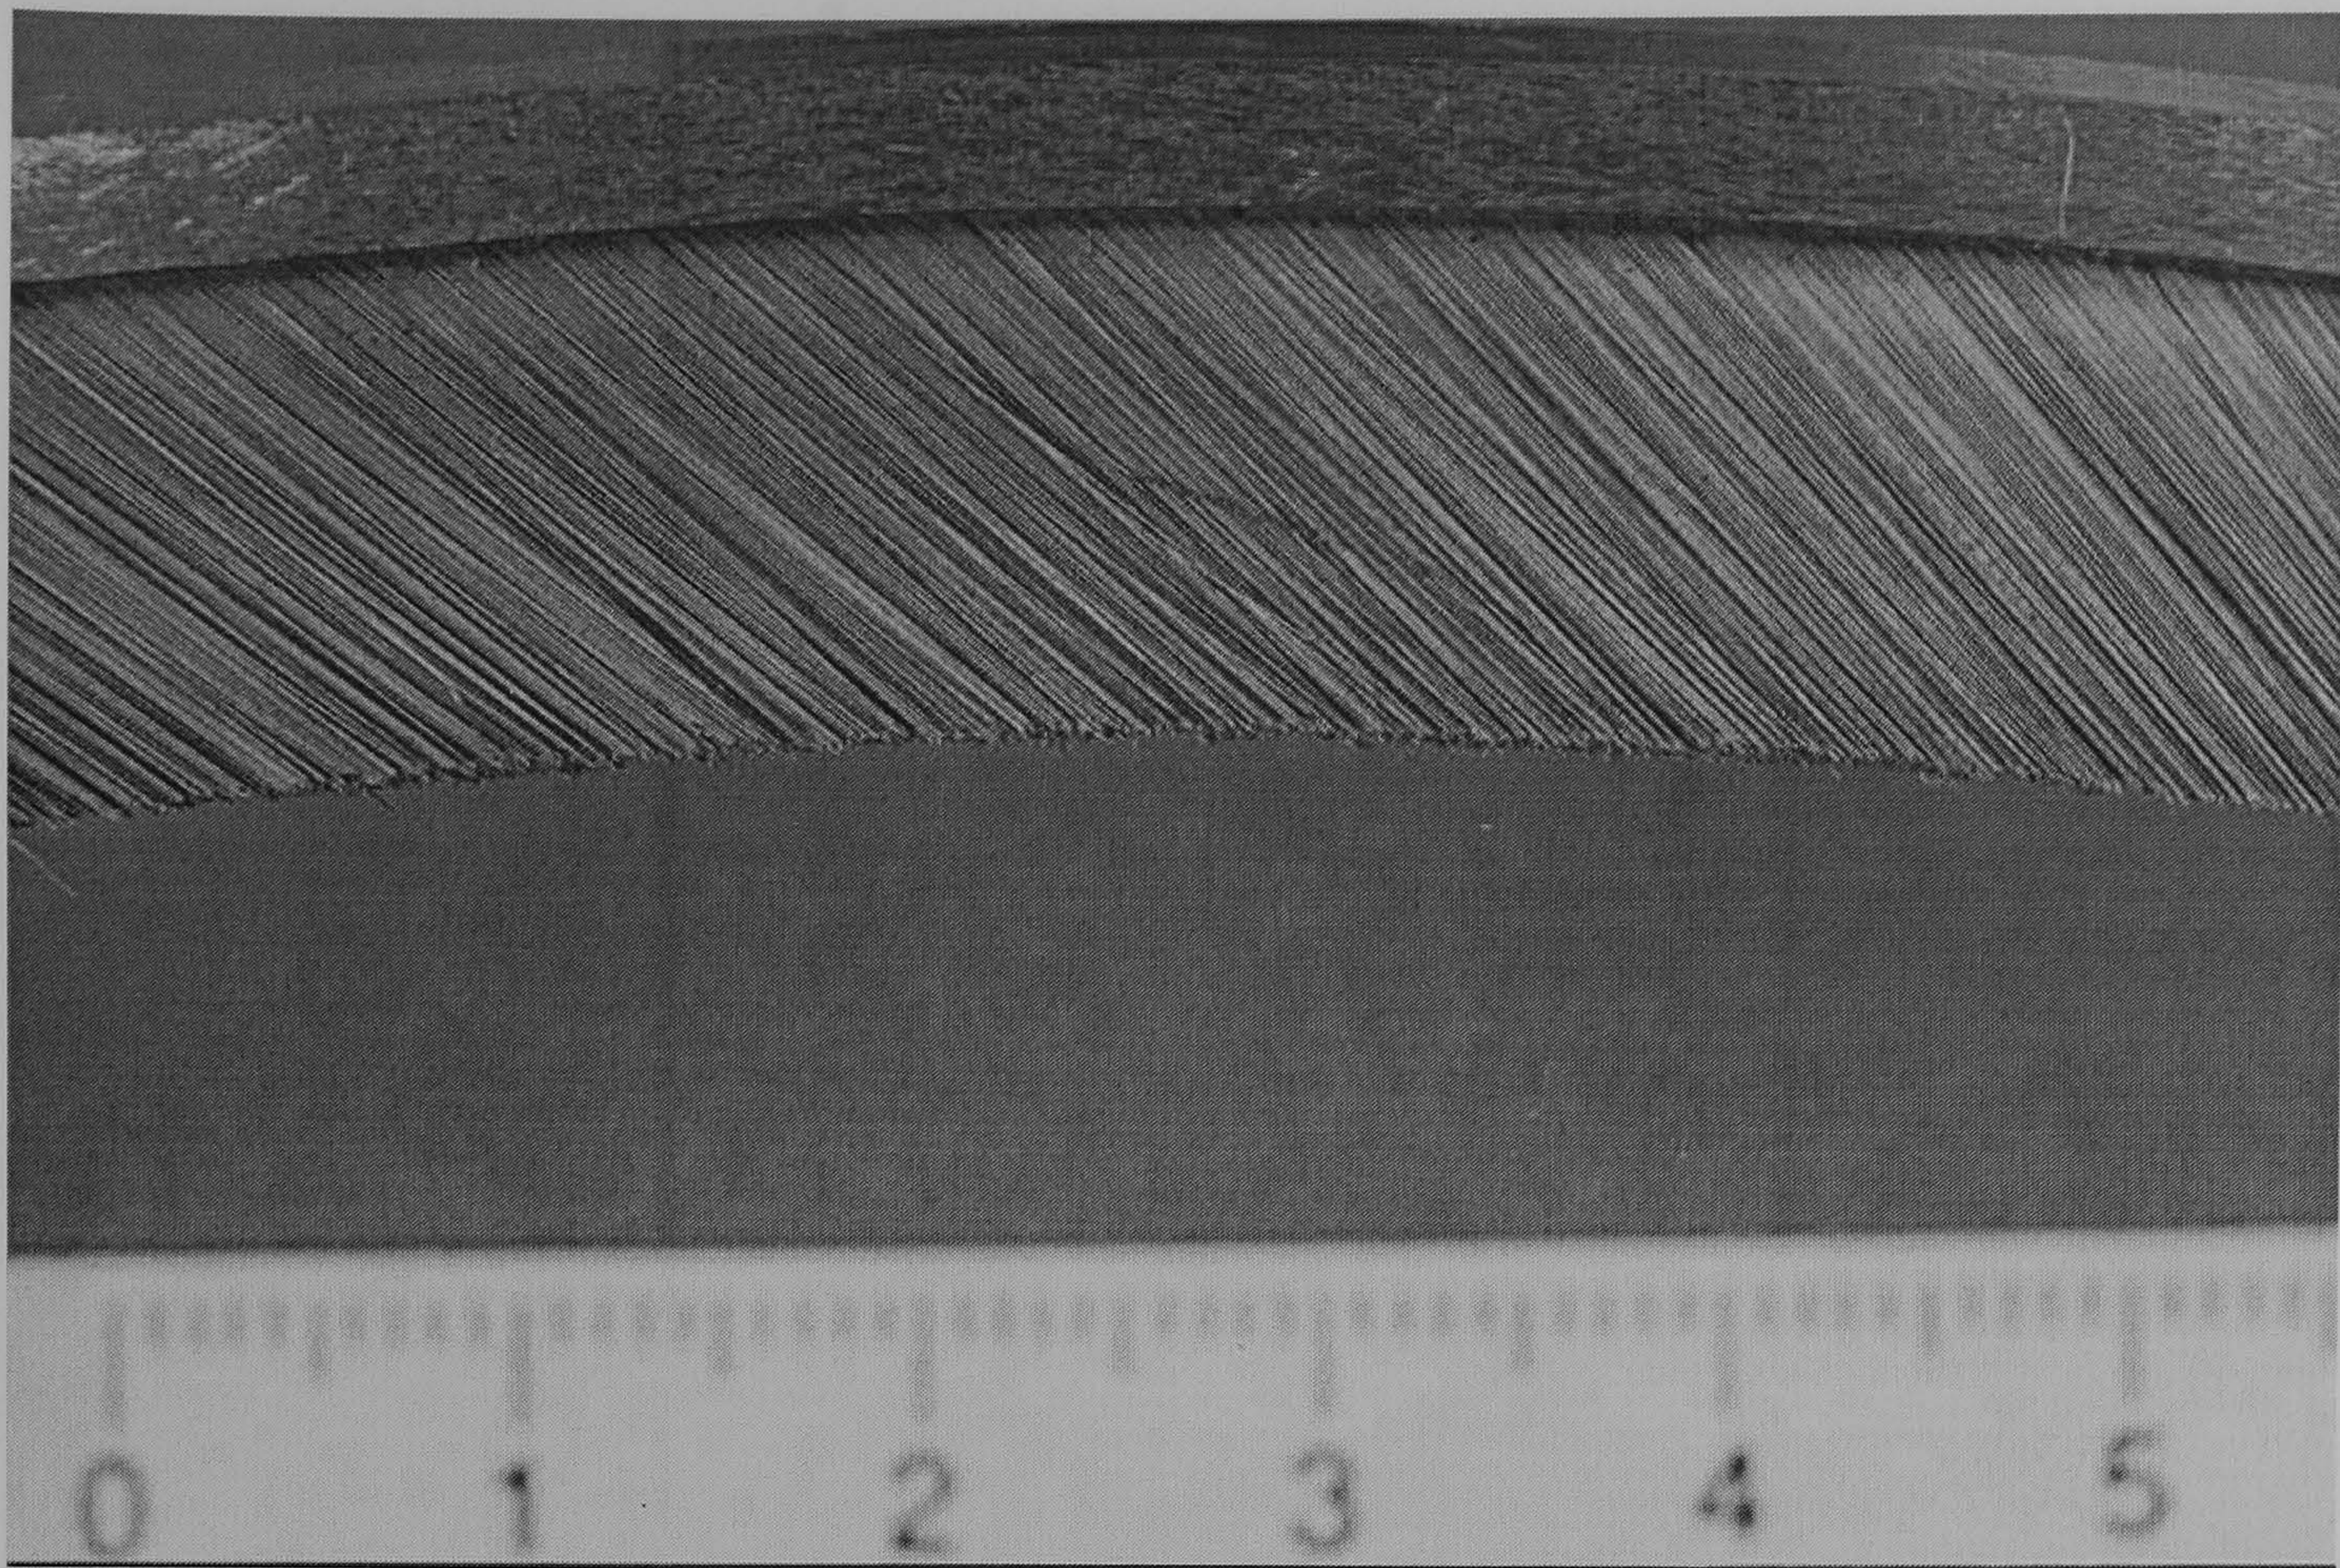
Frontal view (high pressure side) of a brush seal showing the front plate and bristle lay angle.
